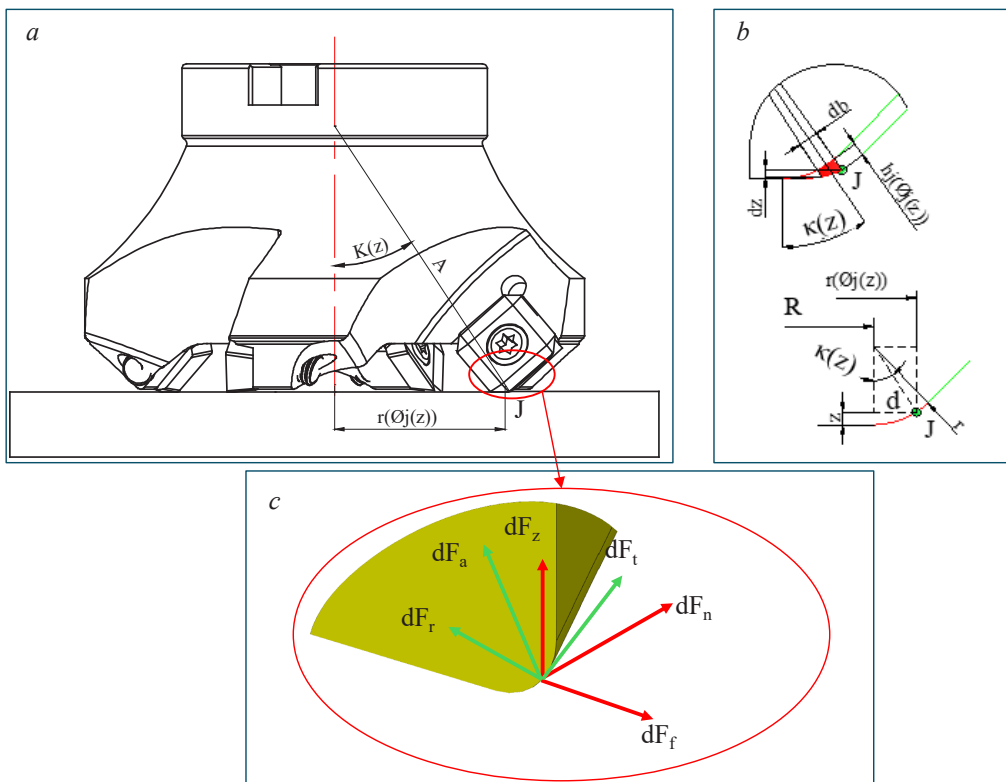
MF in face milling process: *a* – cutter and workpiece interaction; *b* – thickness and length of cutting edge; *c* – MF components
